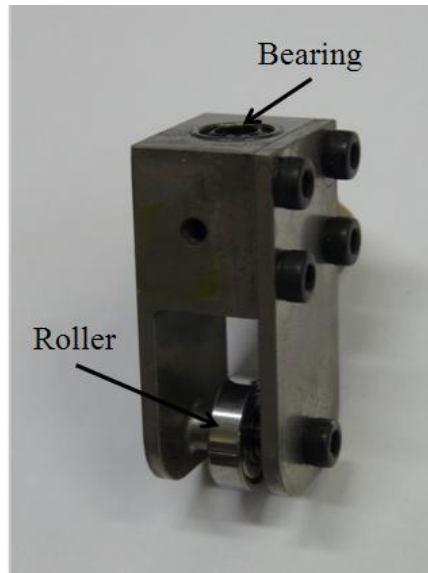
The Roller Guide with the Roller and Bearing.
